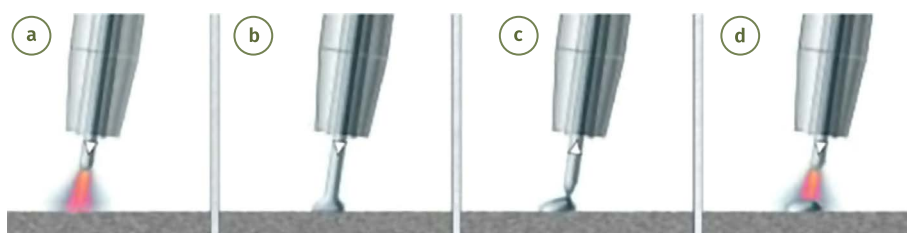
Process of CMT technology: (a) – arc ignition; (b) – short arc phase wire extension; (c) – wire inversion; (d) – arc re-ignition
